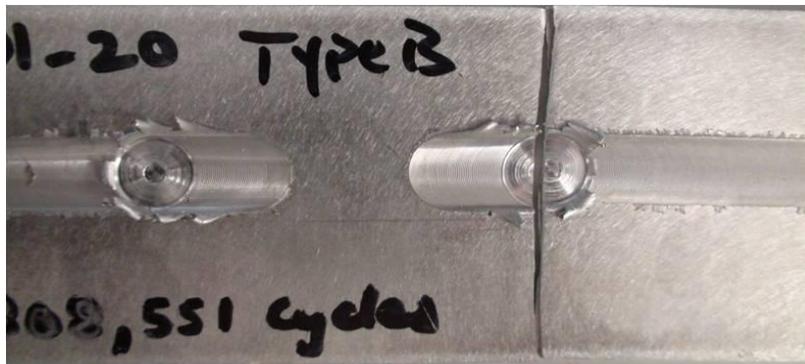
Example of failure location in weld end (exit hole eliminated)
